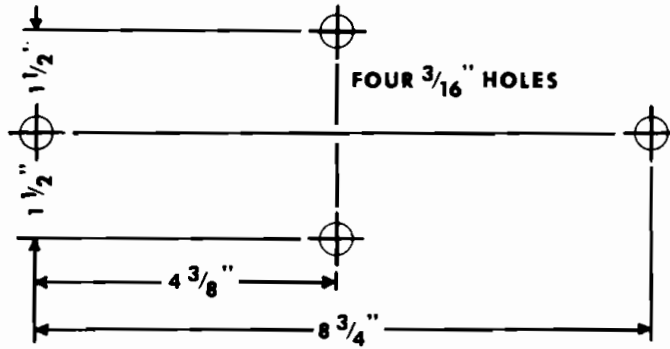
Reverb Spring Mounting Hole Drilling Template
